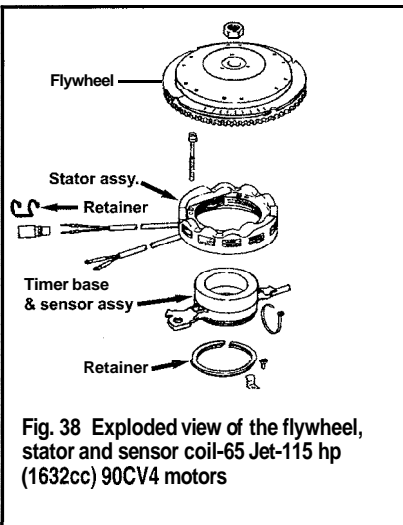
Exploded view of the flywheel, stator and sensor coil-65 Jet-115 hp (1632cc) 90CV4 motors
